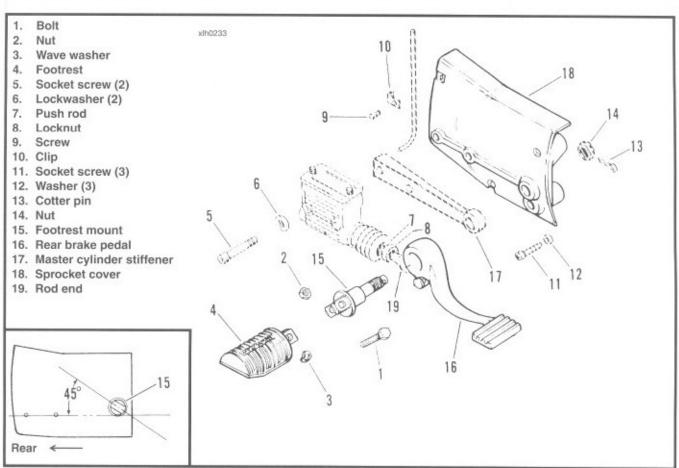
Footrest Mounting, Rear Brake Linkage and Sprocket Cover
